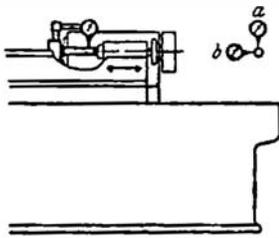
Parallelism between Tailstock Sleeve and Direction of Table Traverse
